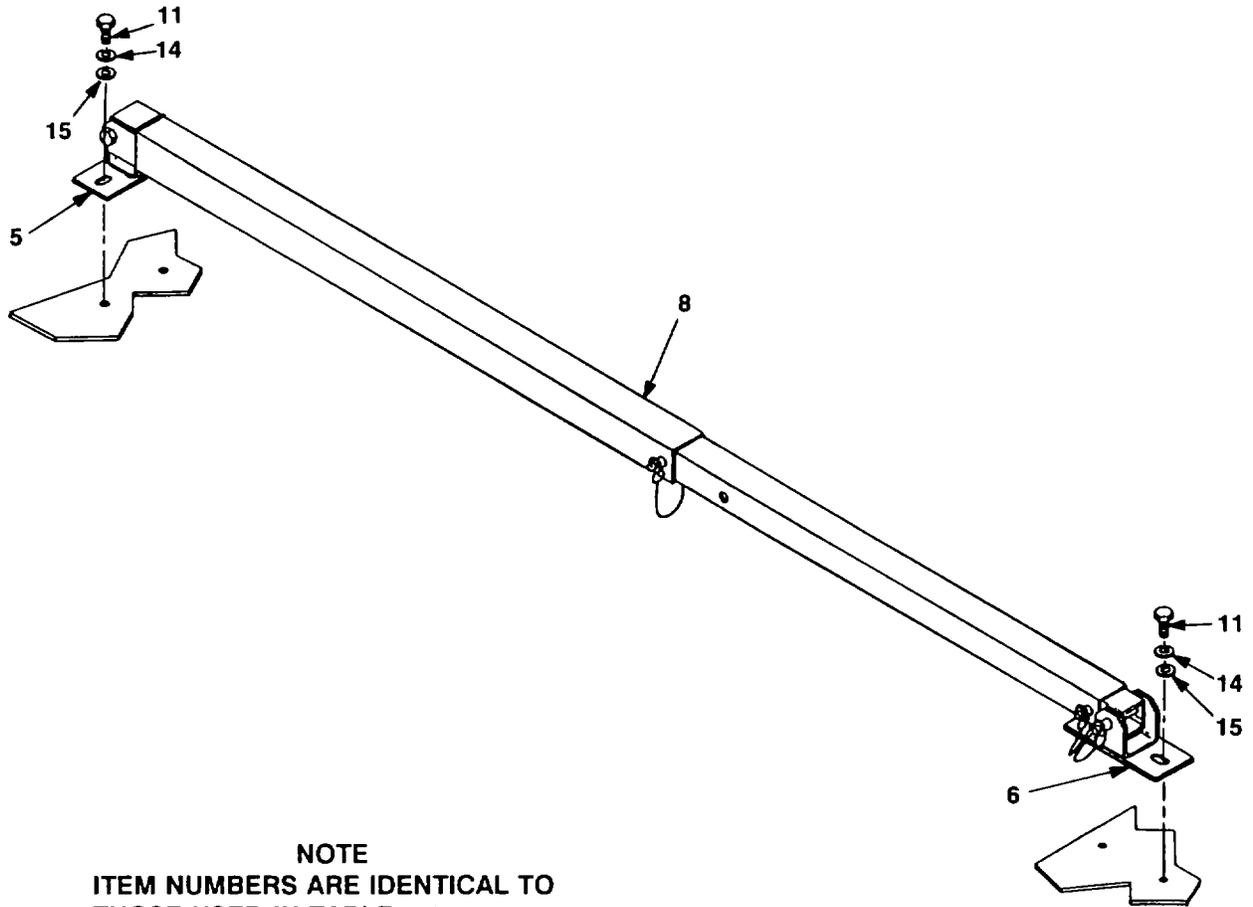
Tracked Vehicle Mounting Kit and Mast Installation (Sheet 3 of 3)
